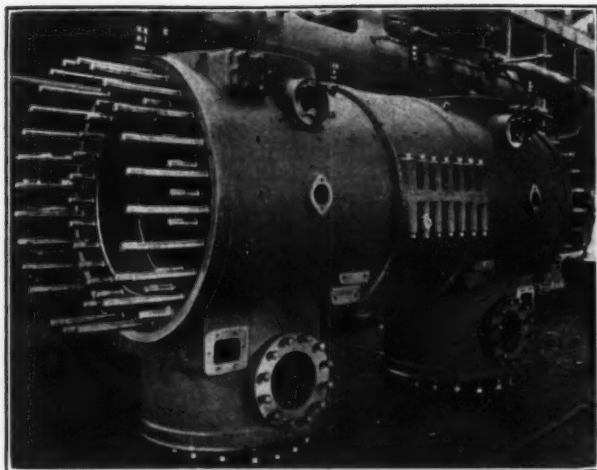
A Gas Engine Cylinder Partly Assembled.
